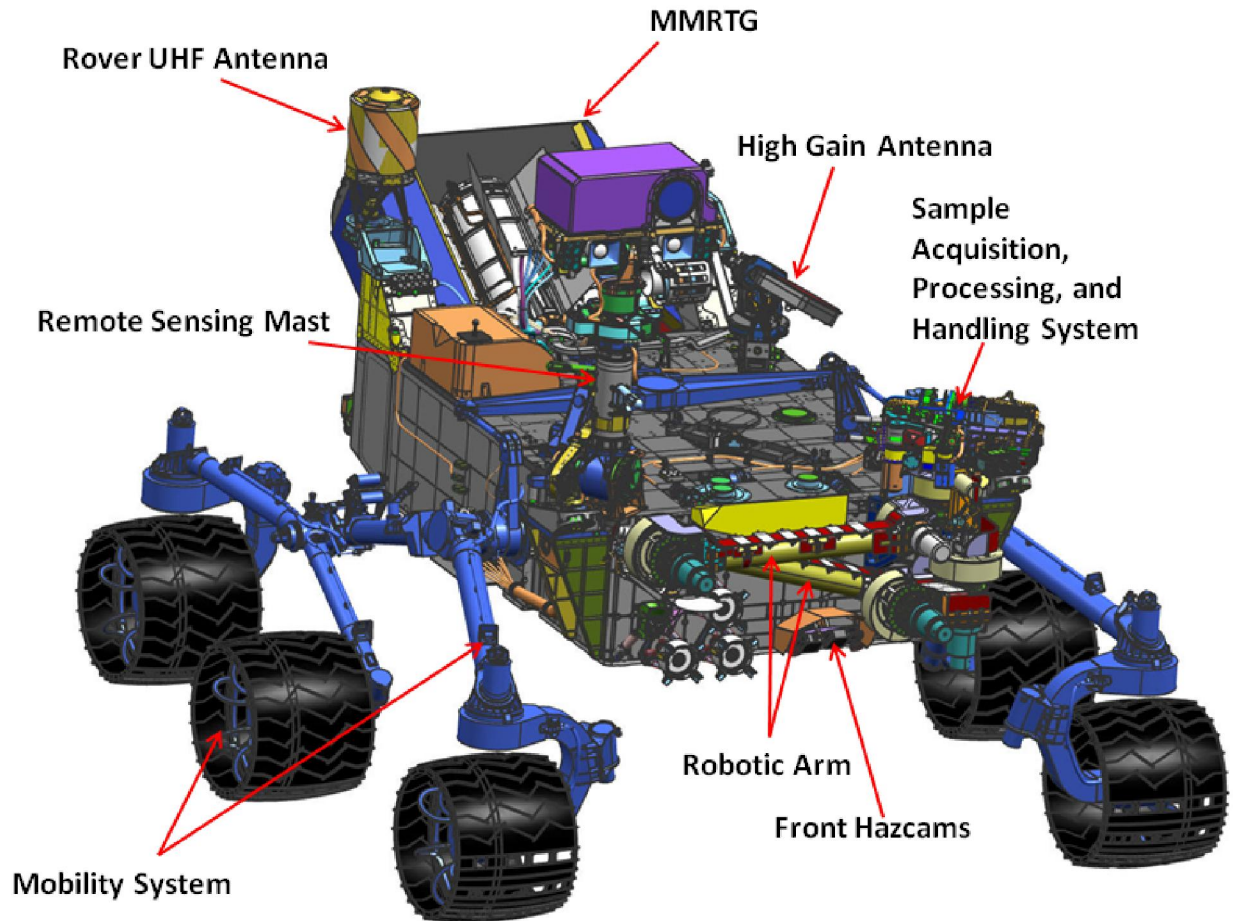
Drawing of the rover indicating some of the major components. Robotic arm is stowed (folded up) in front of the rover.
